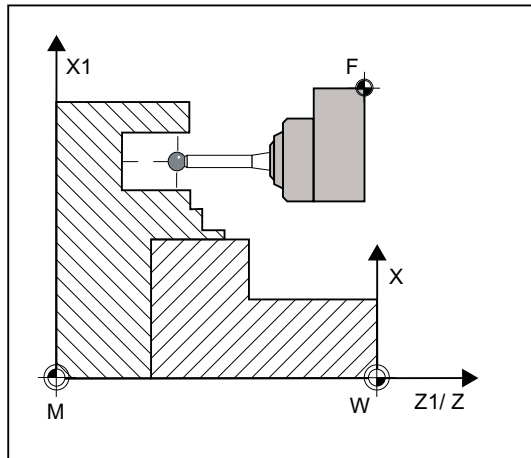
Calibrating a workpiece probe, example: Calibrating in the reference groove
